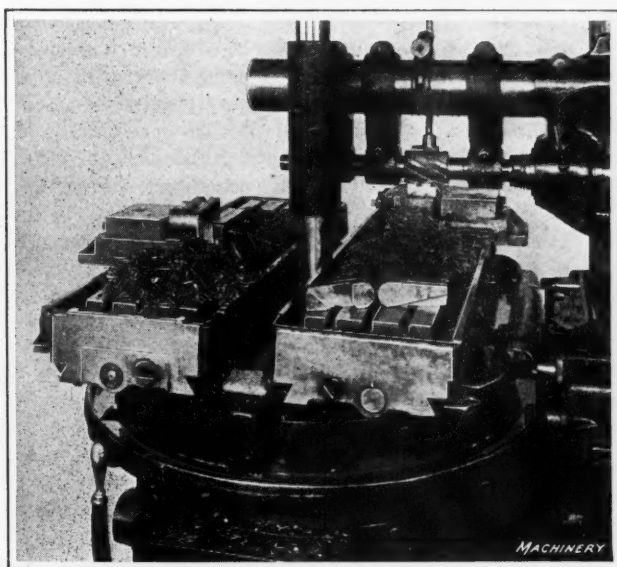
Indexing Milling Machine equipped for performing Seventh Operation on Turret Revolving Pawls
